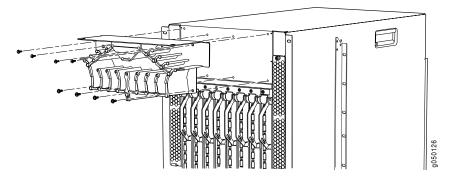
Installing the Cable Management System on a QFX3008-I Interconnect Device
